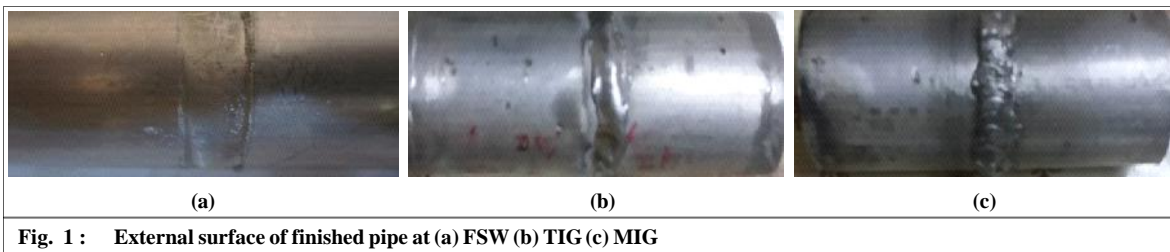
External surface of finished pipe at (a) FSW (b) TIG (c) MIG
